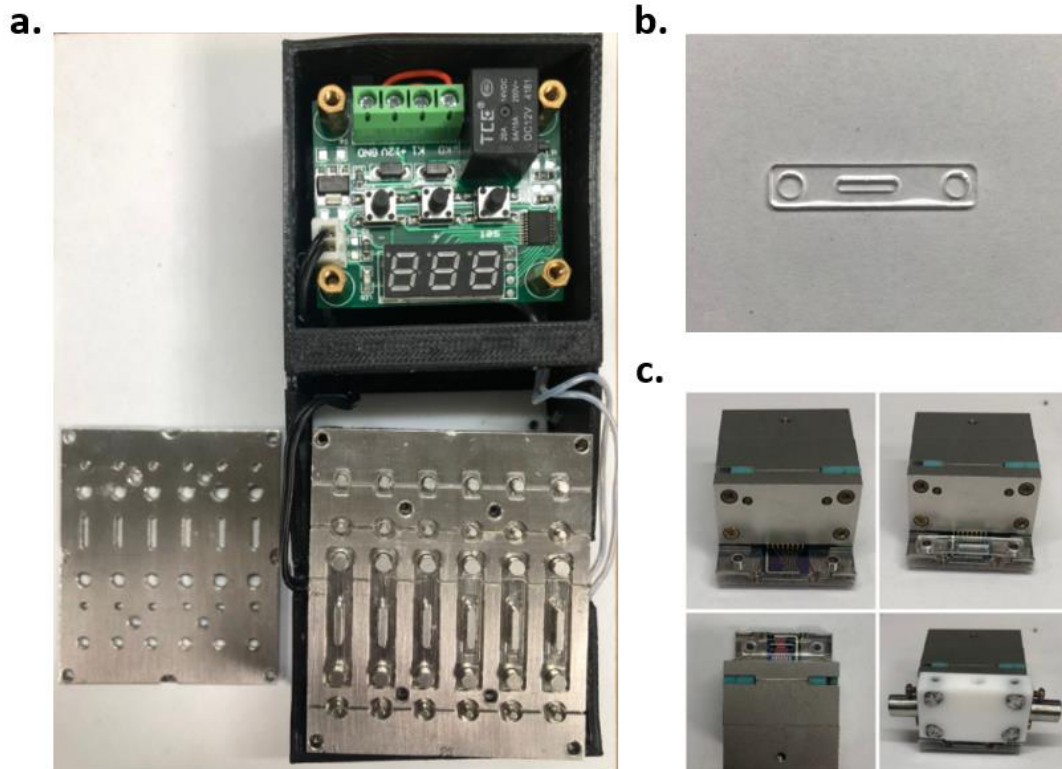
(a) fluidic channel mold, (b) fluidic channel slabs, (c) sensor assembly.
